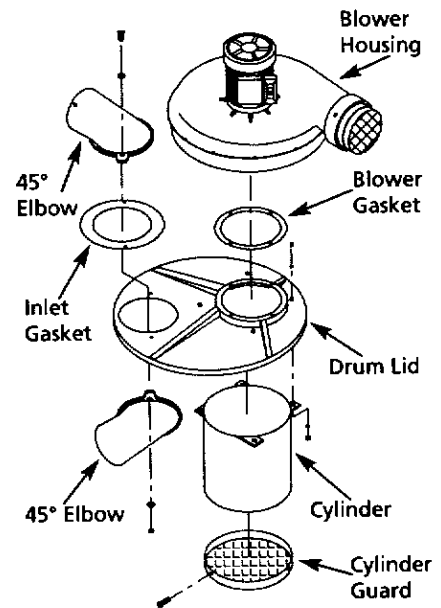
Mounting Drum Lid, Cylinder, Guard and 45° Elbows
